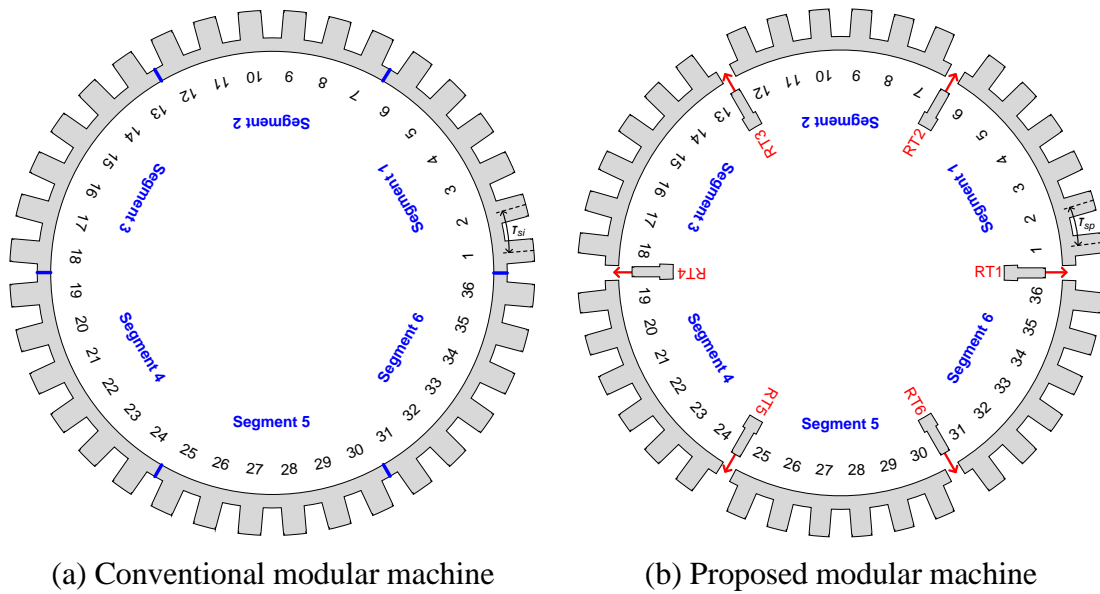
Stator core construction of the conventional and proposed modular machines.
